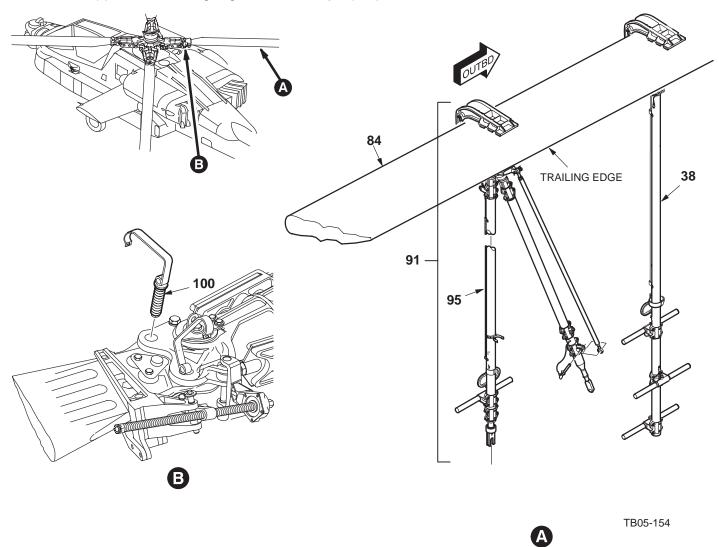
Aircraft Blade Pin from R/H AFT Blade Trailing Edge
